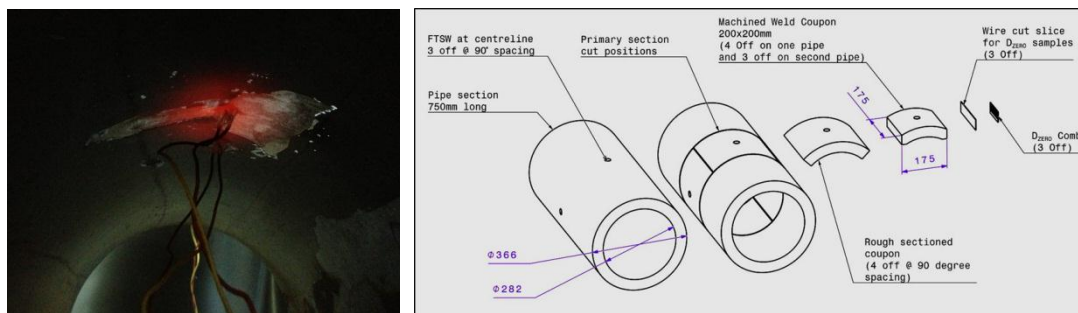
Degree of heat penetration during induction heat treatment (inner pipe surface) and schematic showing steps from welding to removal of weld coupons and d_0 samples.
